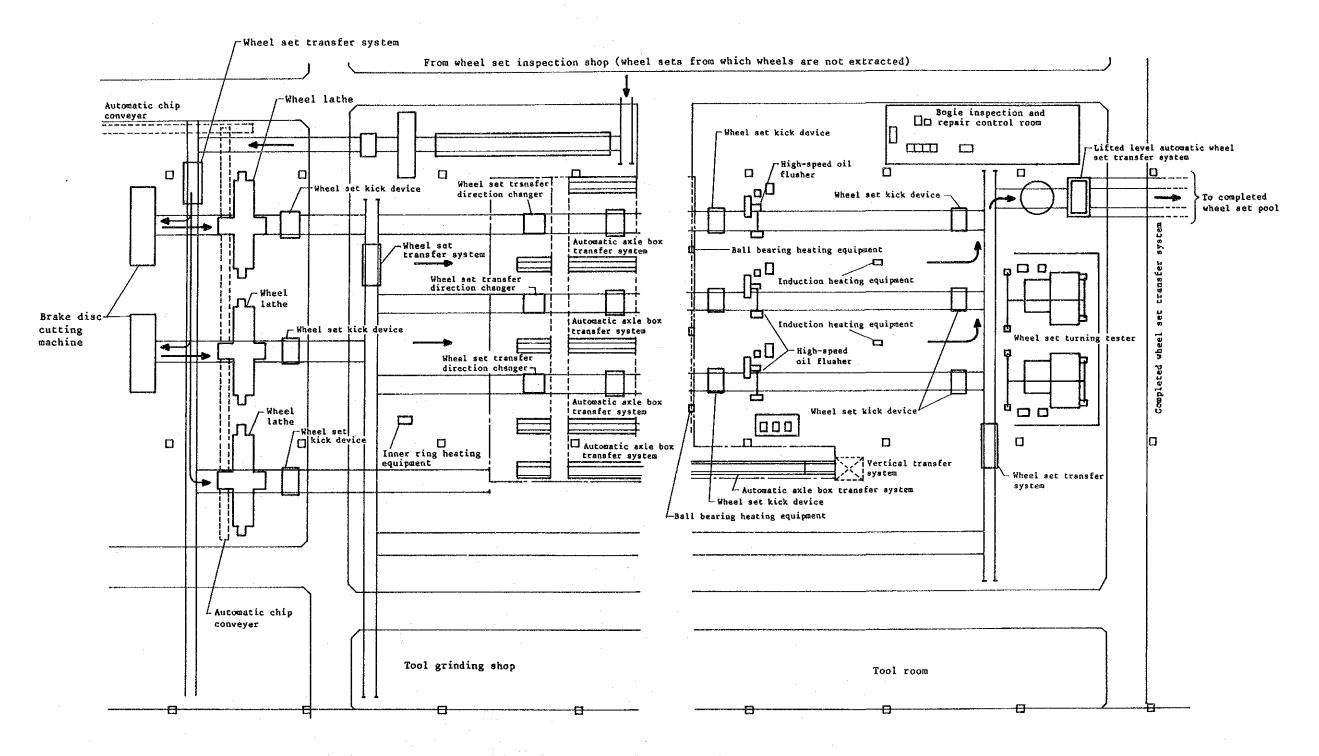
Layout 2 for Wheel Set Inspection and Repair Facilities
